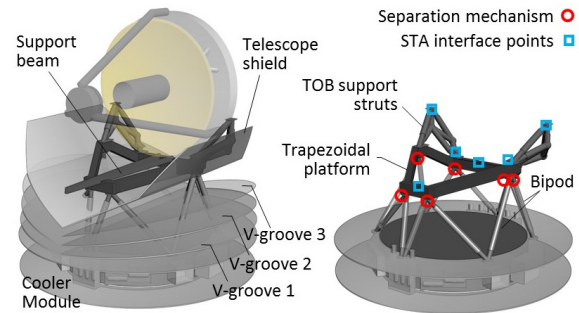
External view of the SPICA cryogenic support structure with bipods, V-groove shields and trapezoidal mounting platform for the telescope assembly.
